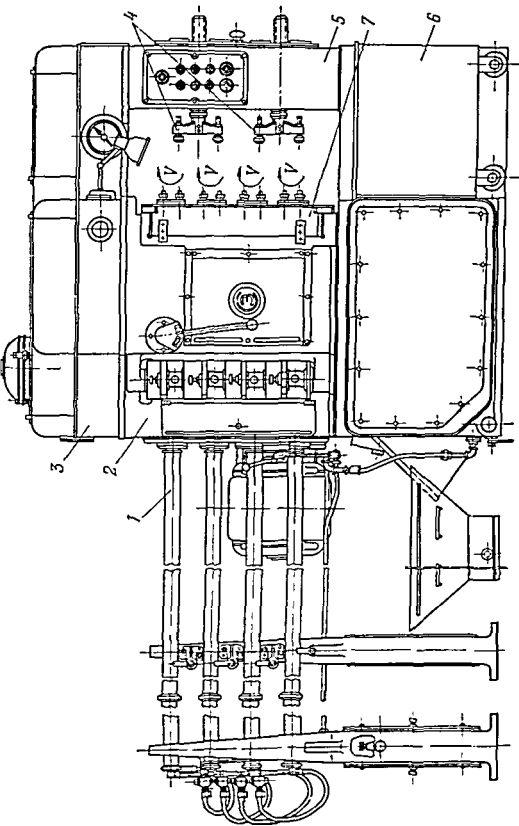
Four-spindle automatic cutting-off machine, model 1240-0
